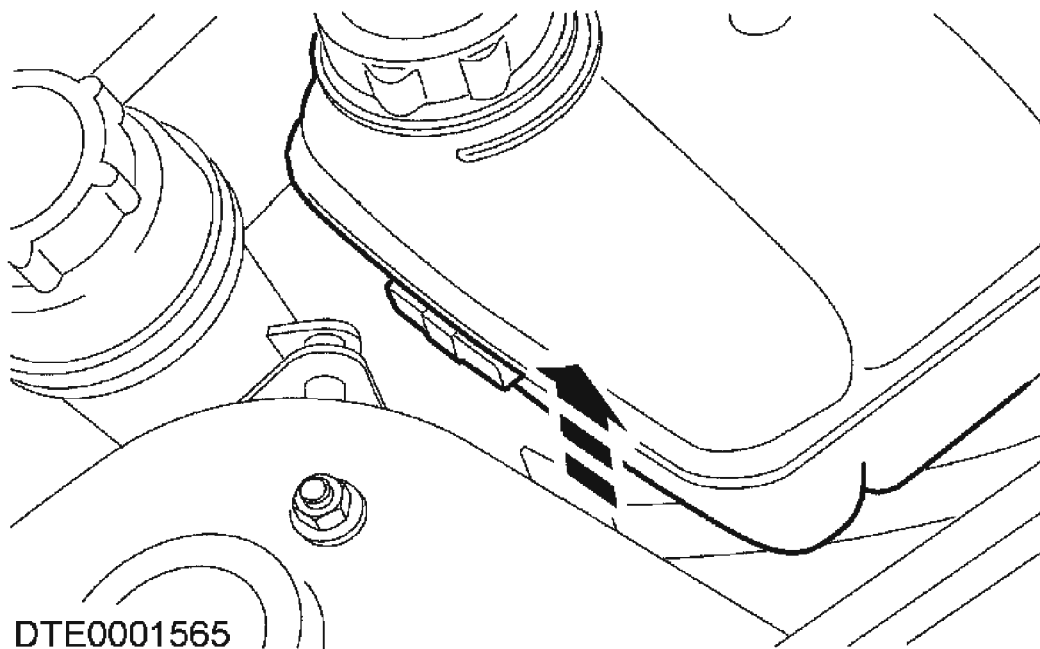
Lifting Coolant Expansion Tank Out Of Retainer
